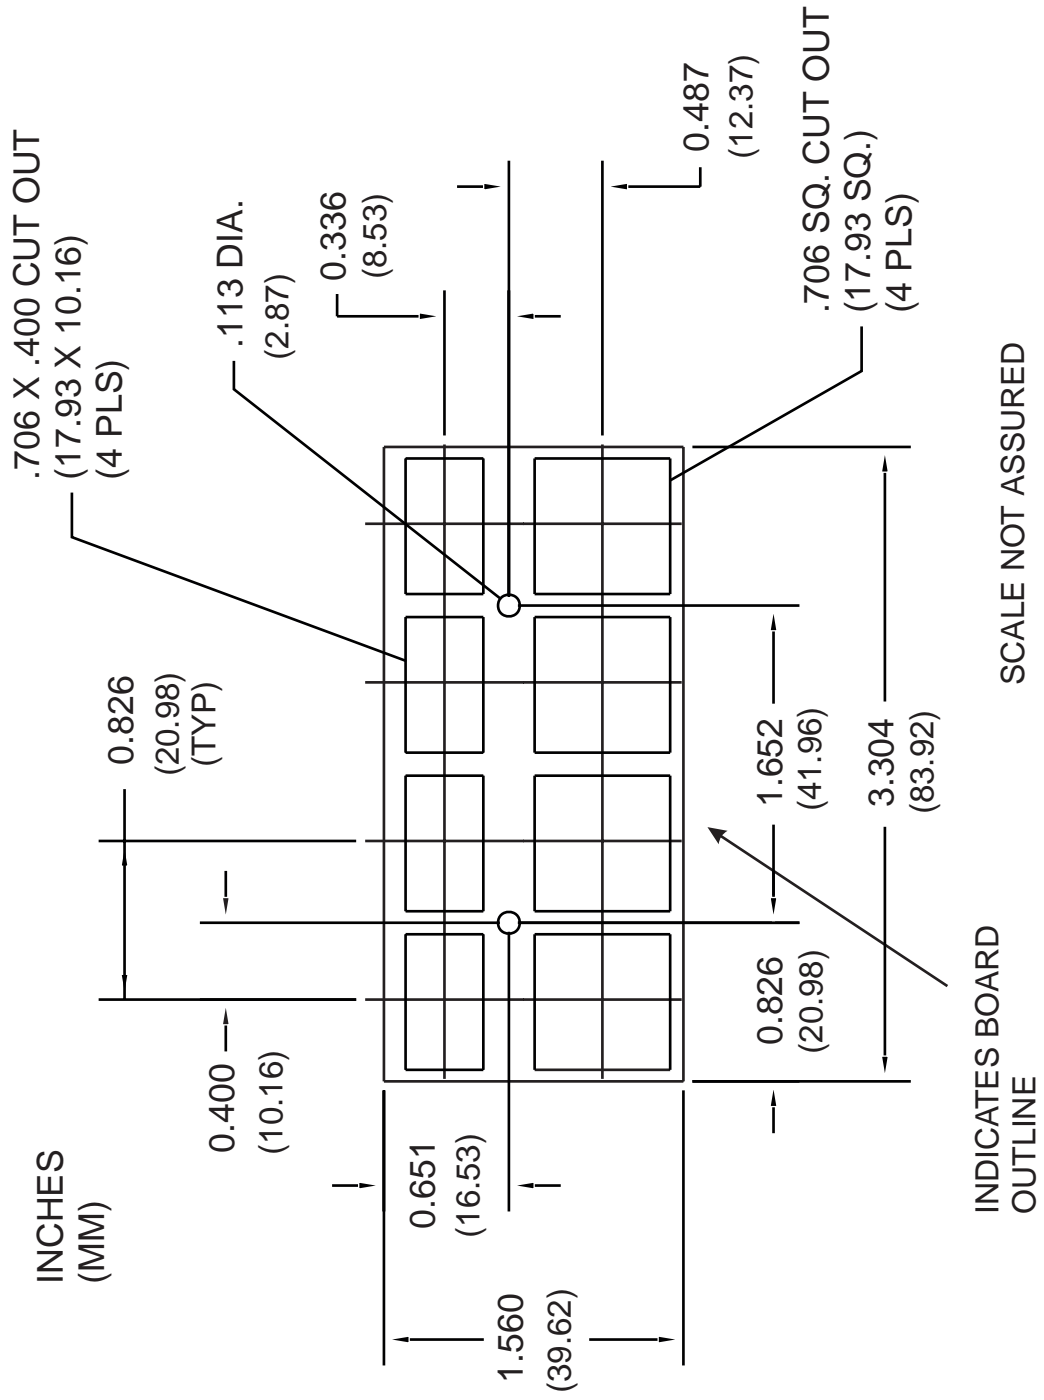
Panel Cutout Dimensions for Lever Key PC Board and Pushbutton PC Board (scale not assured)
